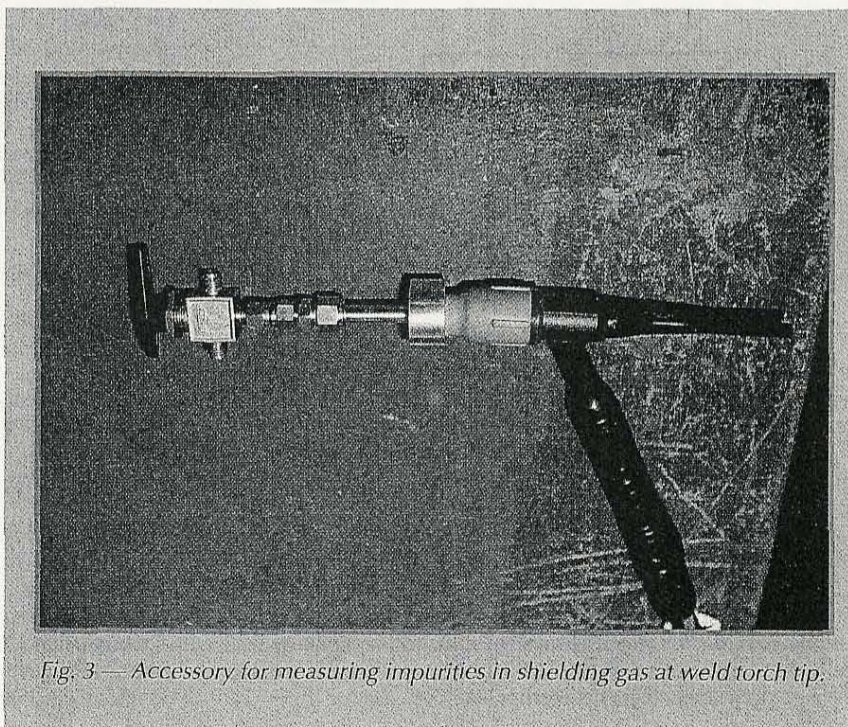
Accessory for measuring impurities in shielding gas at weld torch tip.
